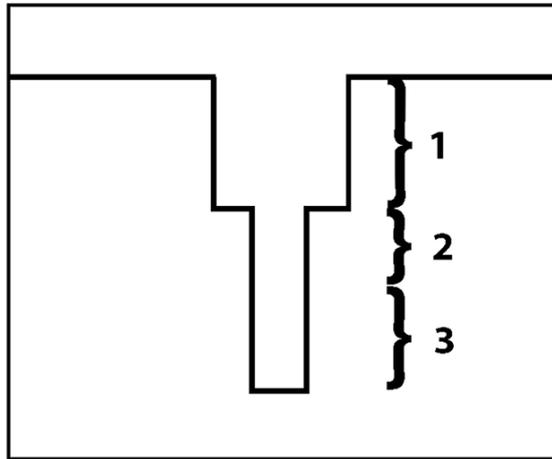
Close up L&P mold chamber: number 1, 2 and 3 represent the upper, middle and lower part
